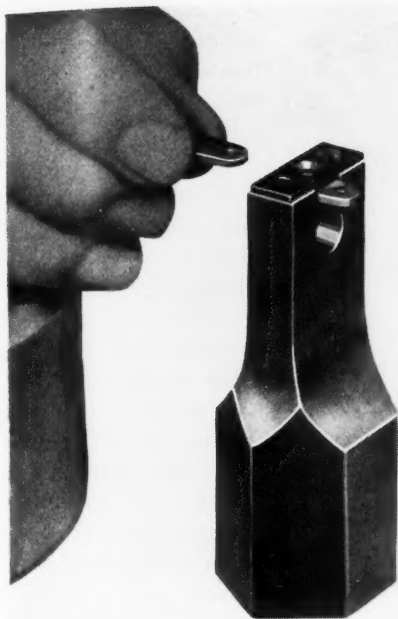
Simple Push-through Fixture Used in Tapping Two Holes in Small Parts
